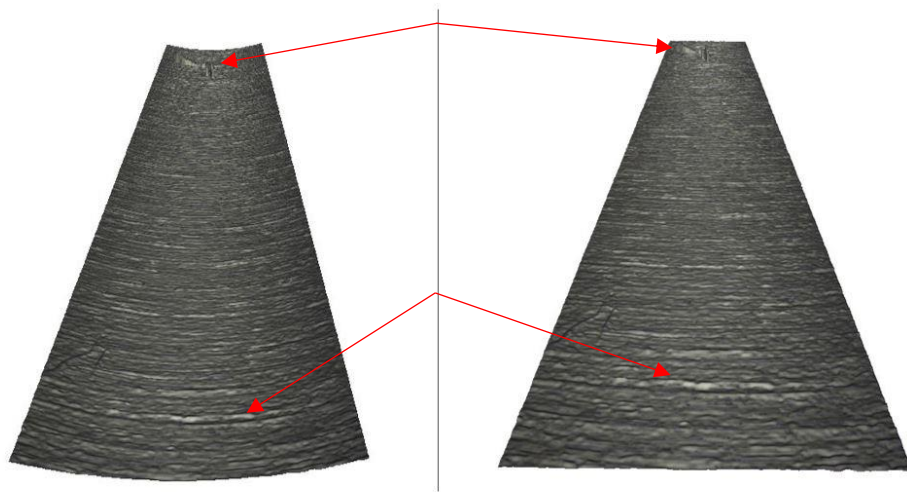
Before cylindrical form removal (left), After cylindrical form removal (right)
